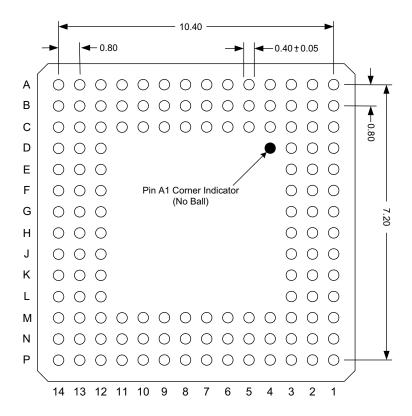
MQ-1132 BGA Package – Bottom View with Dimensions in Millimeters
